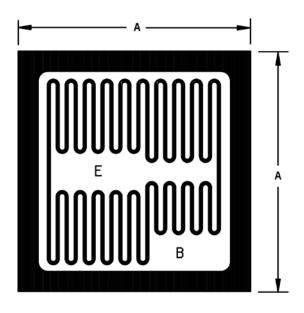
Physical dimensions (similar to TO-5 and TO-39).
